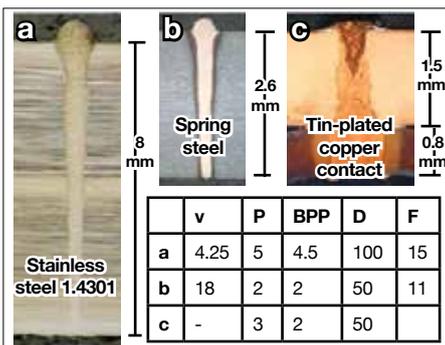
Examples of efficient fibre laser welding with special benefits from brightness: a) fast weld with narrow seam, minimum heat input and minimum distortion; b) high, humping-free welding speed due to minimised melt displacement and reduced acceleration of circulating melt flow by narrow welding capillary; c) stable, well reproducible contact welds due to adequate power and power density and nevertheless a moderate numerical aperture of the focusing system, allowing good accessibility of the weld zone. Table: v (speed, m/min); P (laser power, kW); BPP (mm²mrad); D (fibre diameter (µm)); F (F-number) (c) weld time 0.045s, peak current n*10kA, shear force 400N
